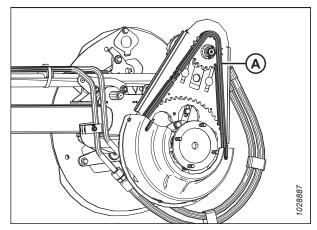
Drive Chain – Double-Reel Drive Shown
